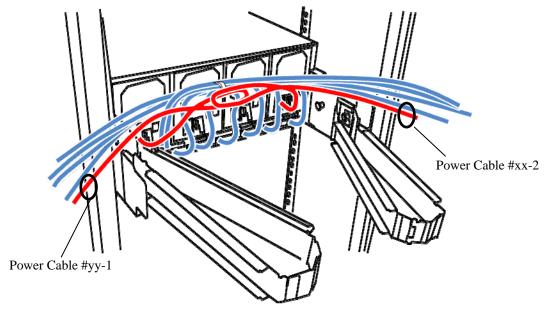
Routing of Power Cables (#xx-2, #yy-1)
